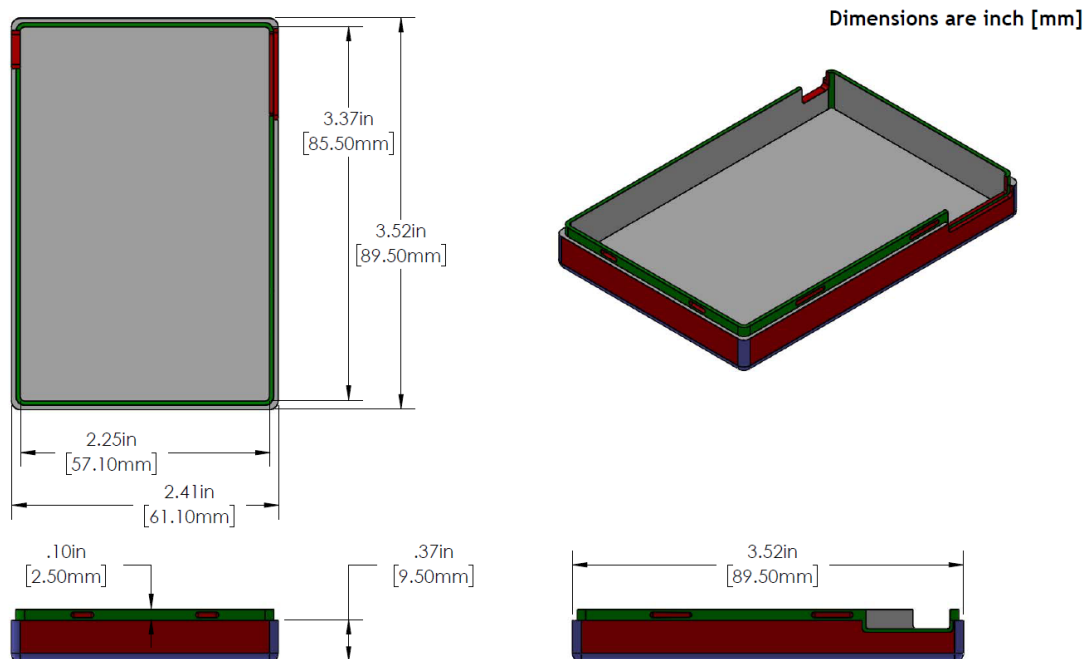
Adapter Enclosure – Bottom Dimensions.
